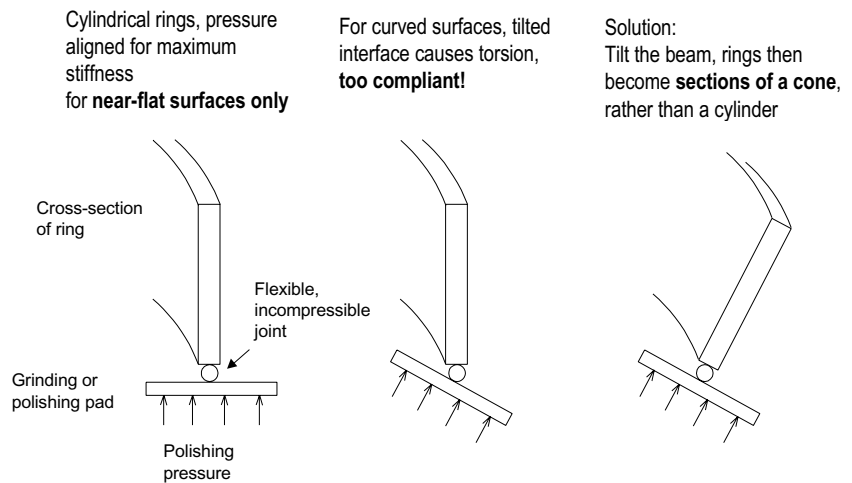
For steep surfaces, the rings must be made conical to maintain alignment of the surface normal to the desired bending axis of the ring section.
